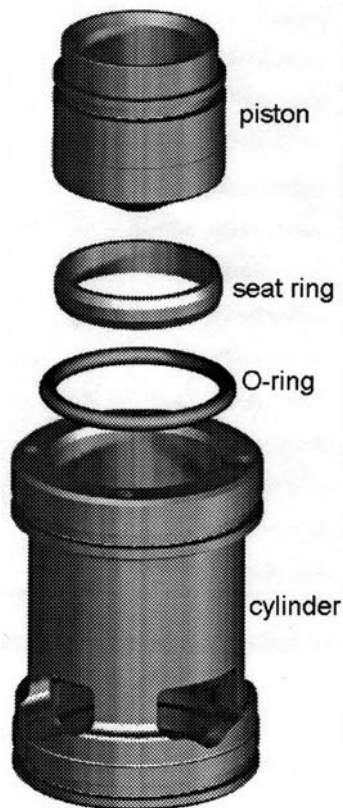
Using the Piston to Insert the Seat Ring into the Cylinder
